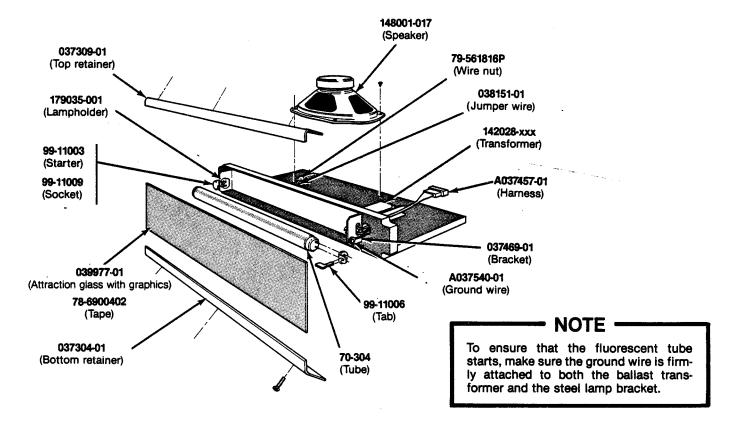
Fluorescent Tube and Speaker A038161-01 & -02 A Parts List
